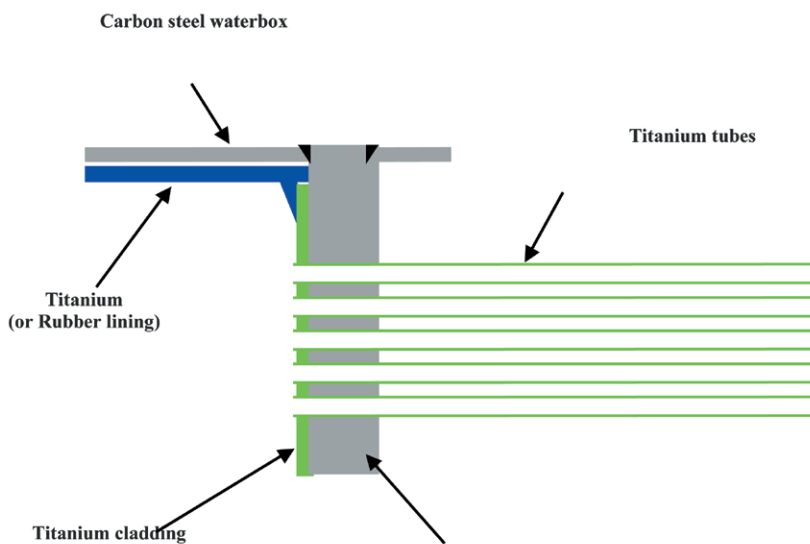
Illustration of typical CS/titanium explosively clad tubesheets.
